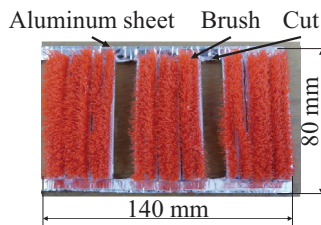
Cleaning brush sheet attached to the gripping unit.
